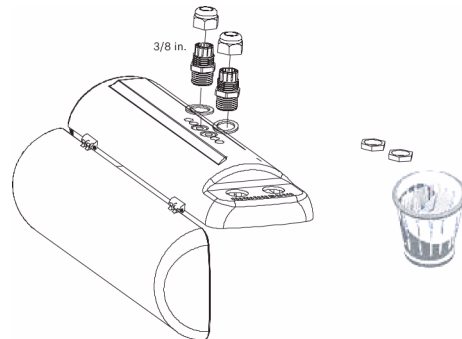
Attaching the 3/8 in. NPT Fittings
